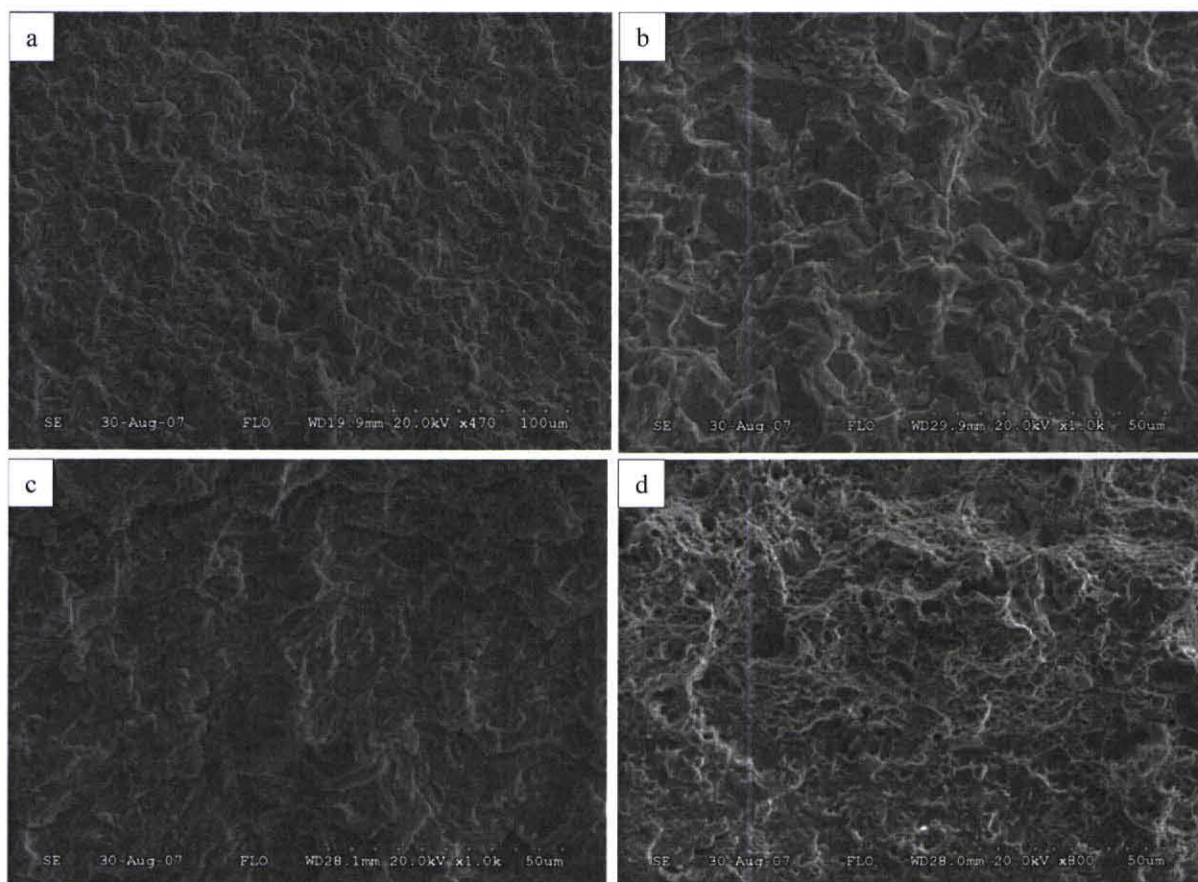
Representative pictures from fracture surface Bolt 5.
